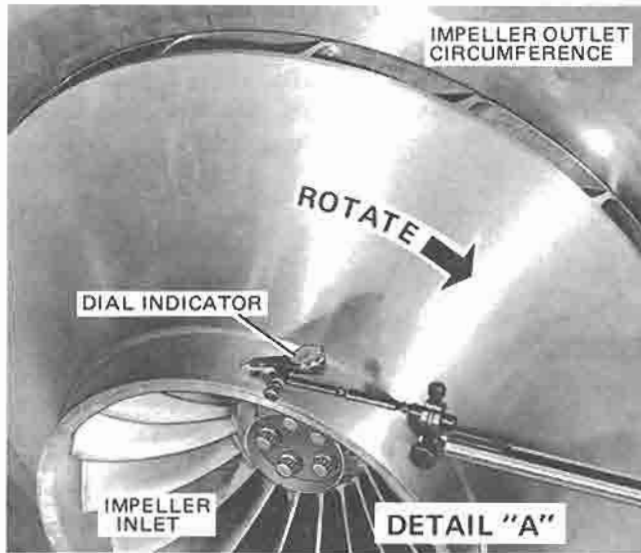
CHECKING AXIAL PLAY ON FRONT HIGH SPEED SHAFT
